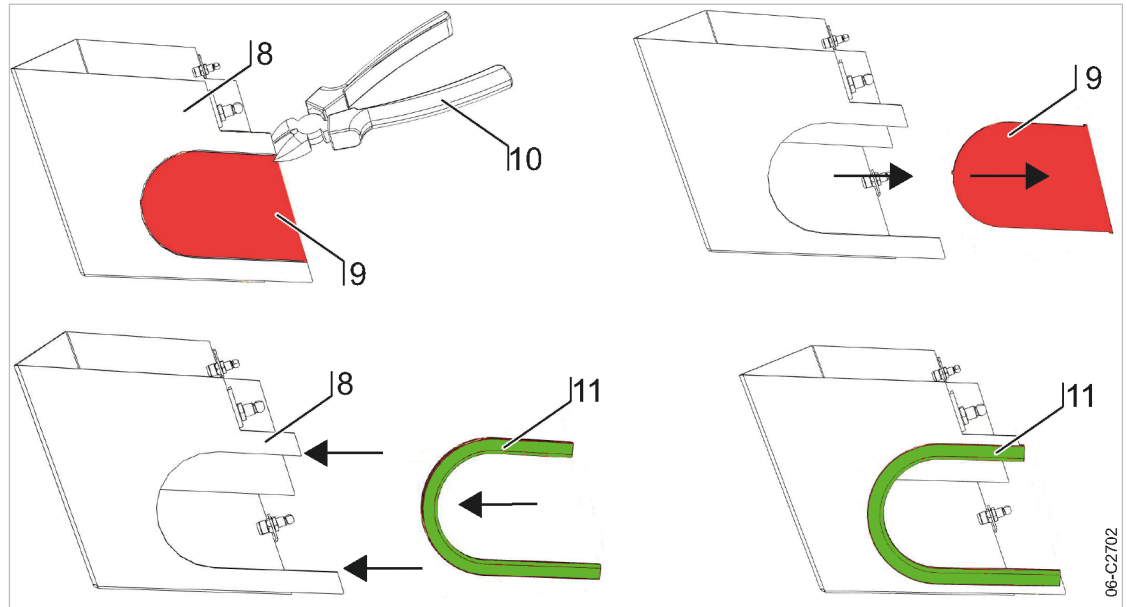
Remove cable insert knock-outs / Attach edge protection
